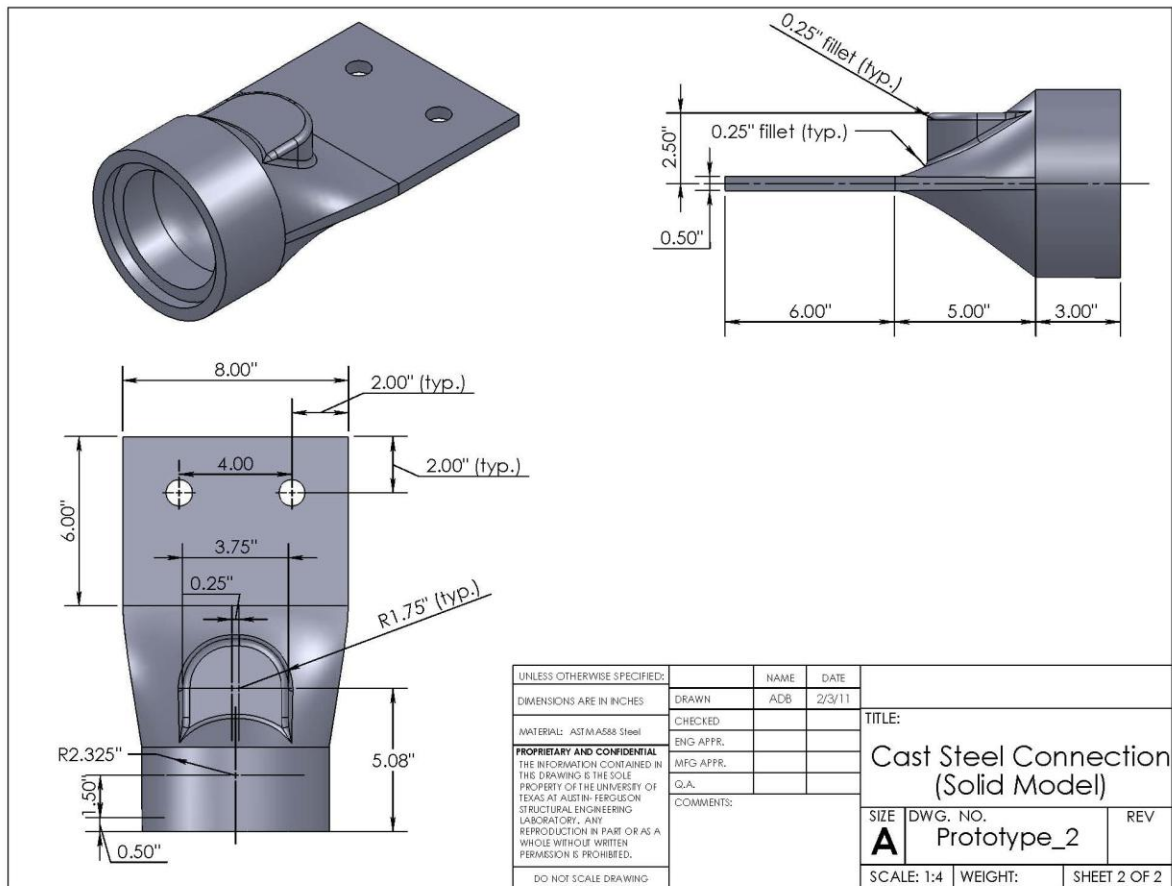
Three Dimensional Drawing of Cast Steel Connection
